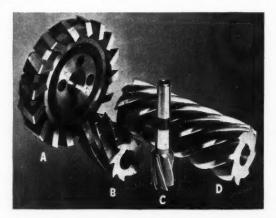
Illustration Showing Cutters Designed for Milling Aluminum
